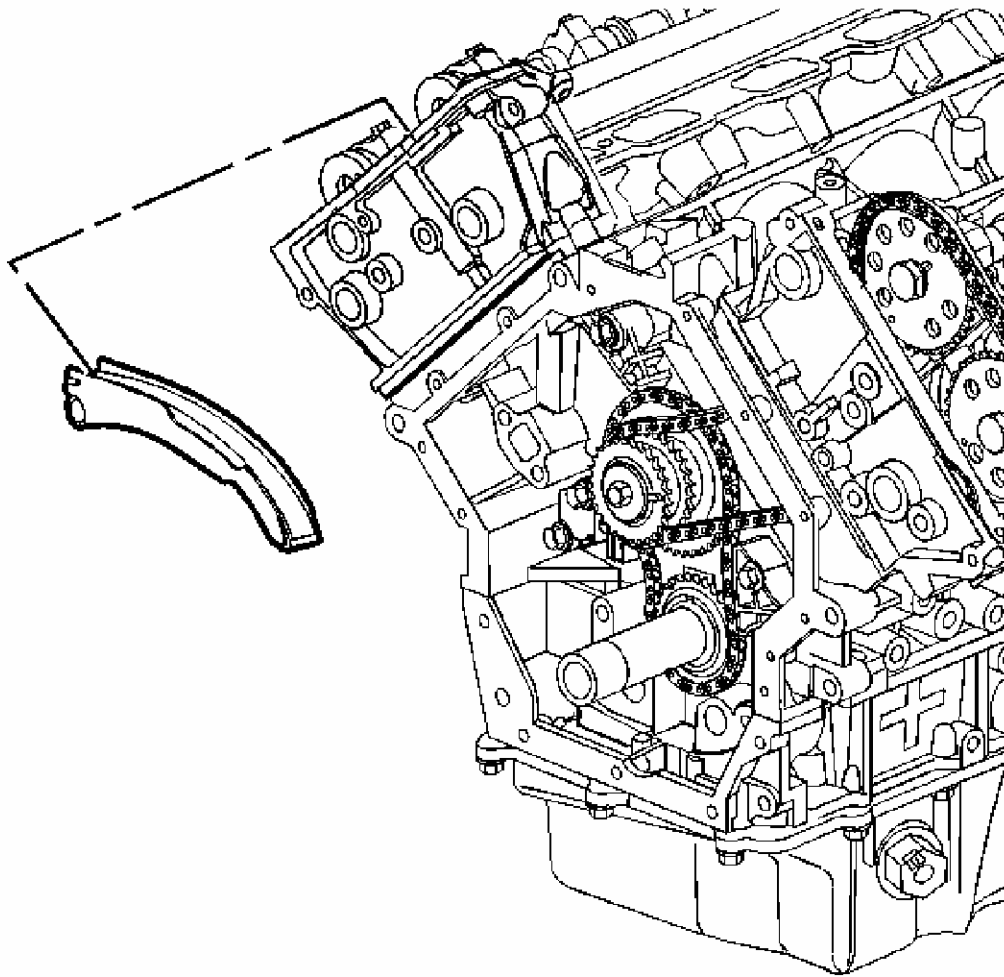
View of Right Secondary Camshaft Drive Chain Shoe
